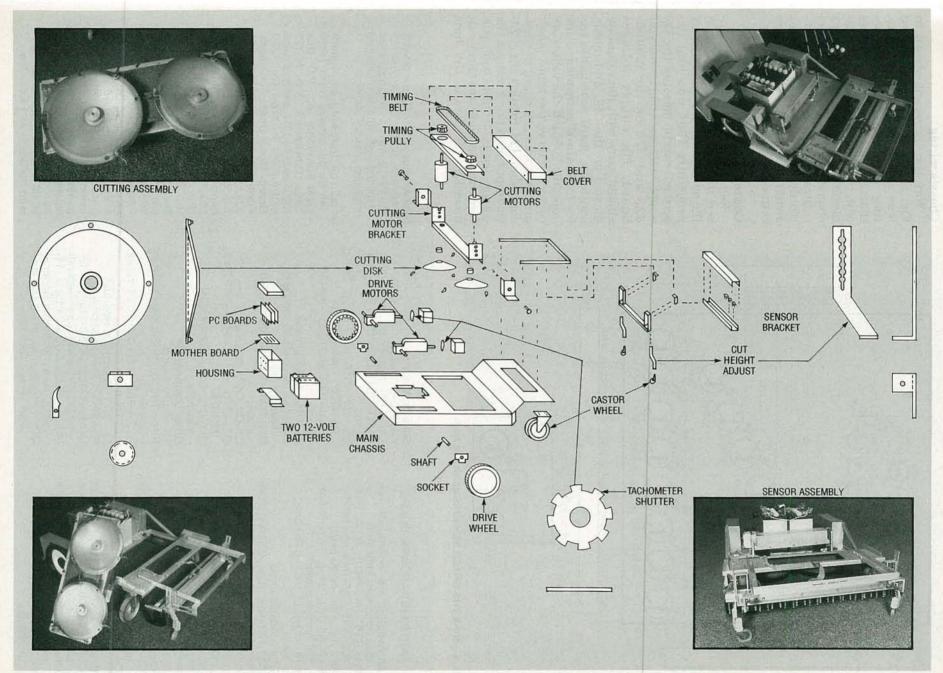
THE MECHANICAL ASSEMBLY of the Lawn Ranger.
